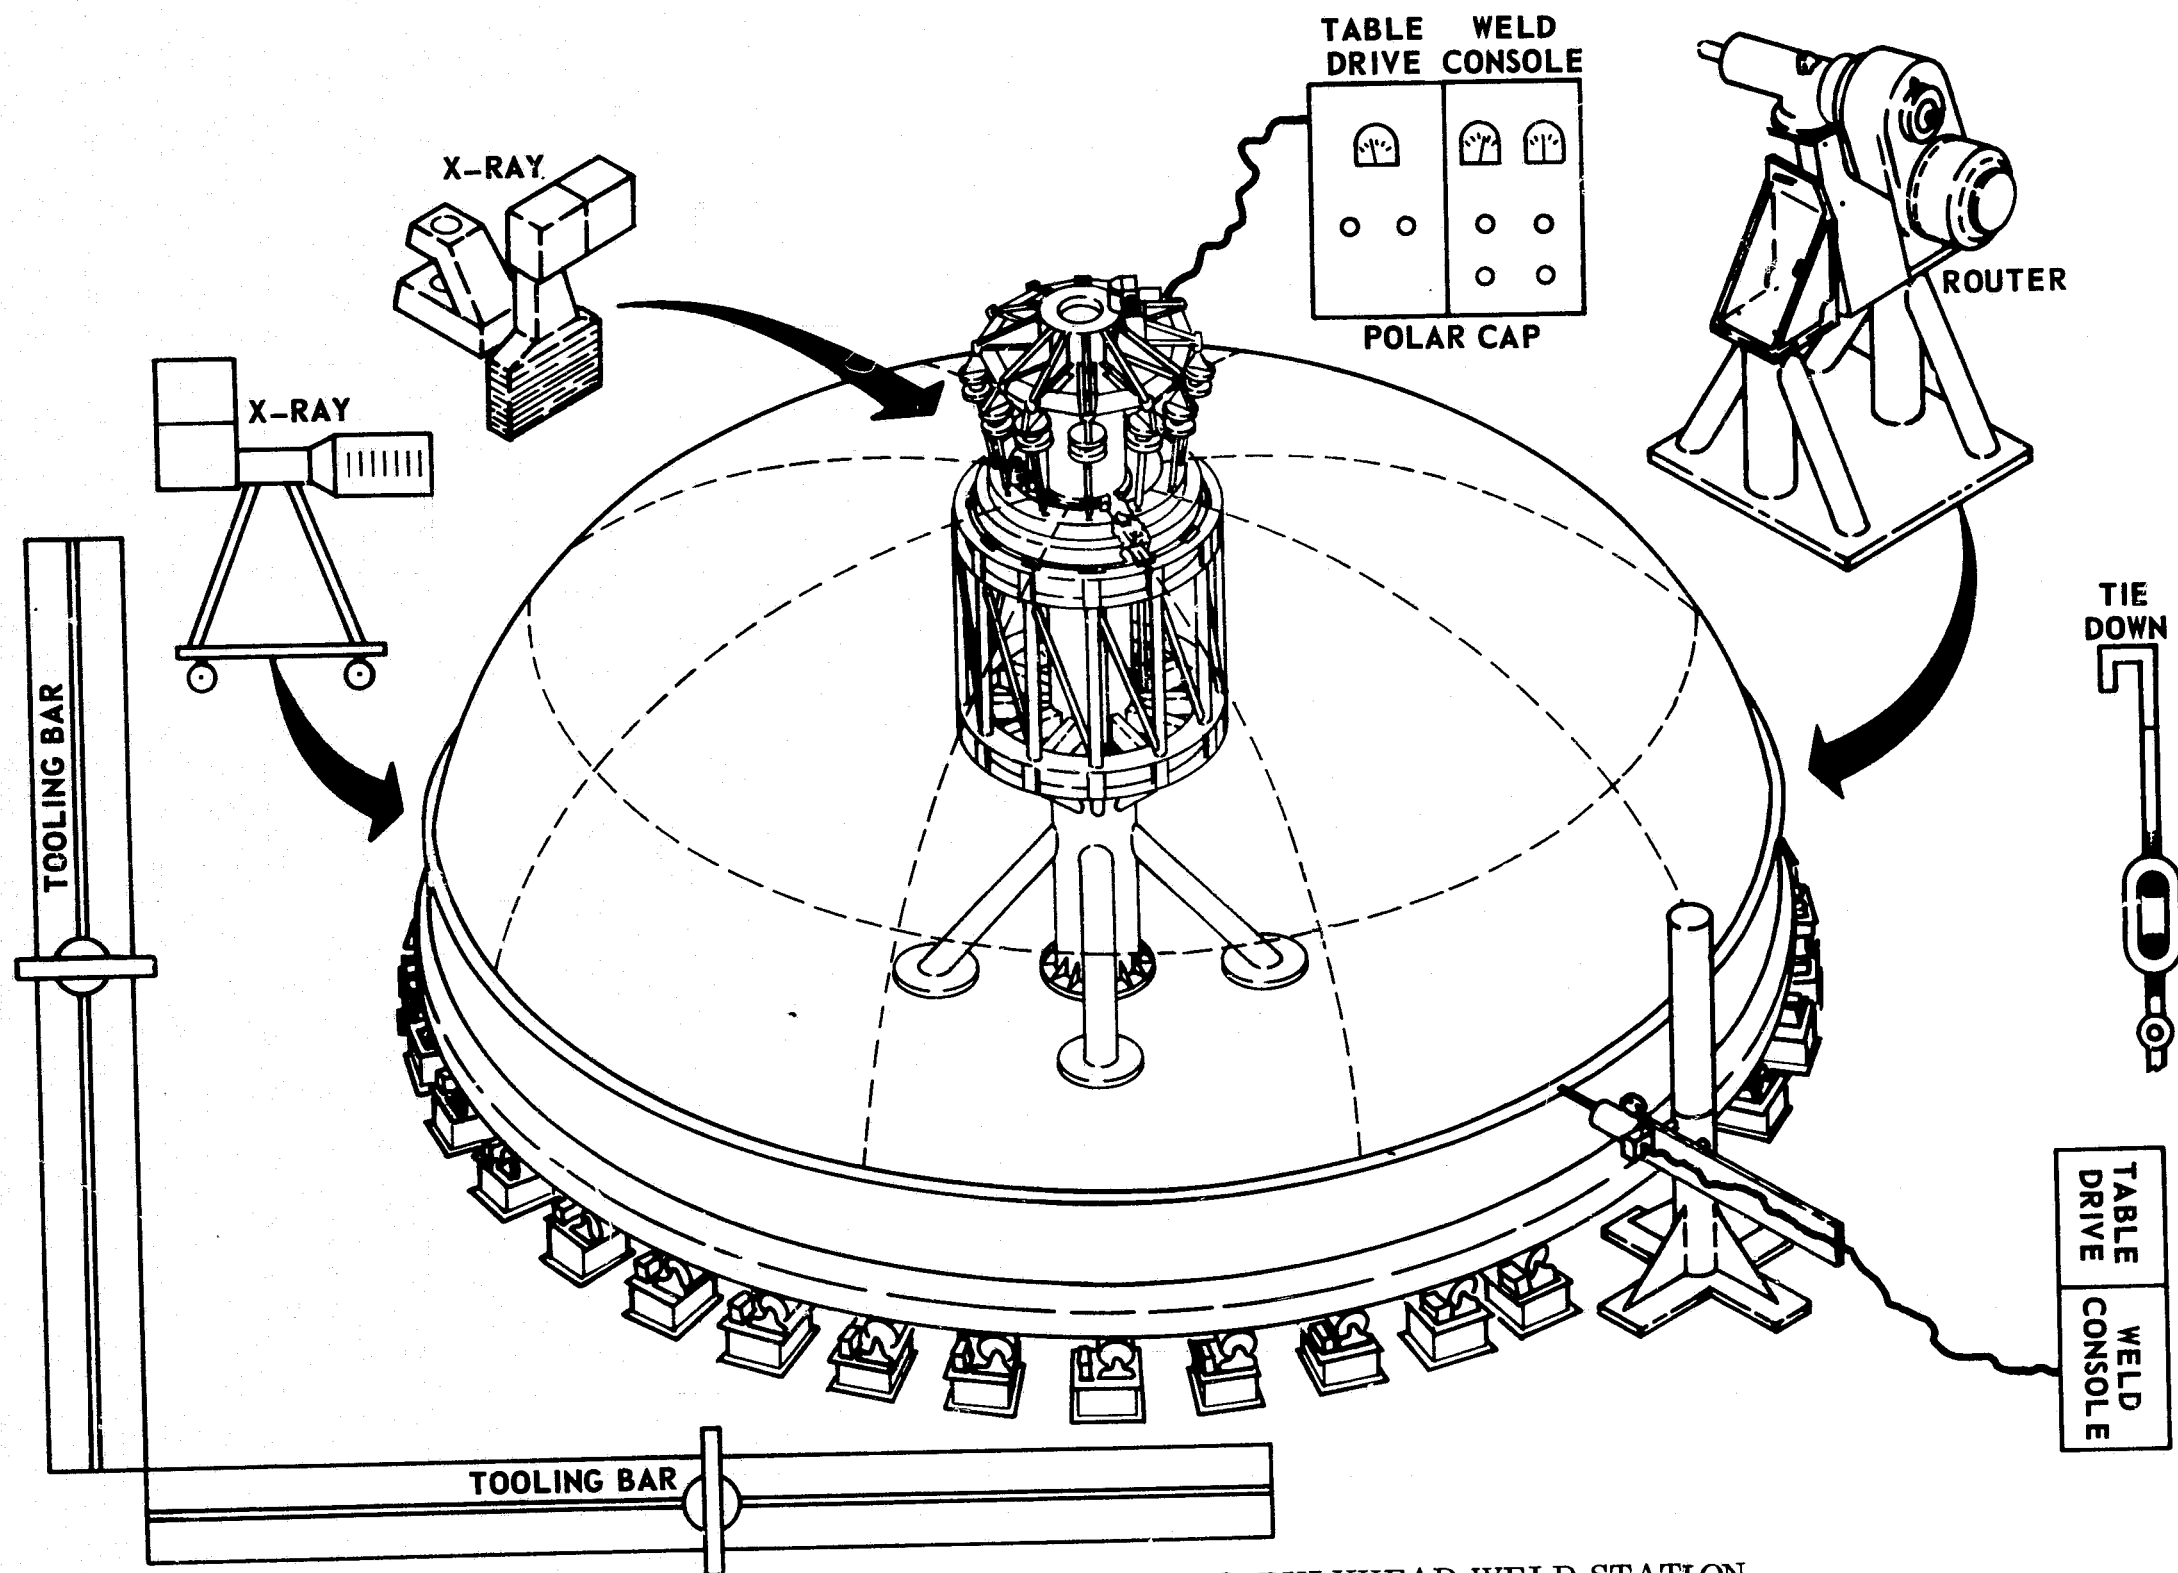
Y-RING AND POLAR CAP-TO-BULKHEAD WELD STATION
